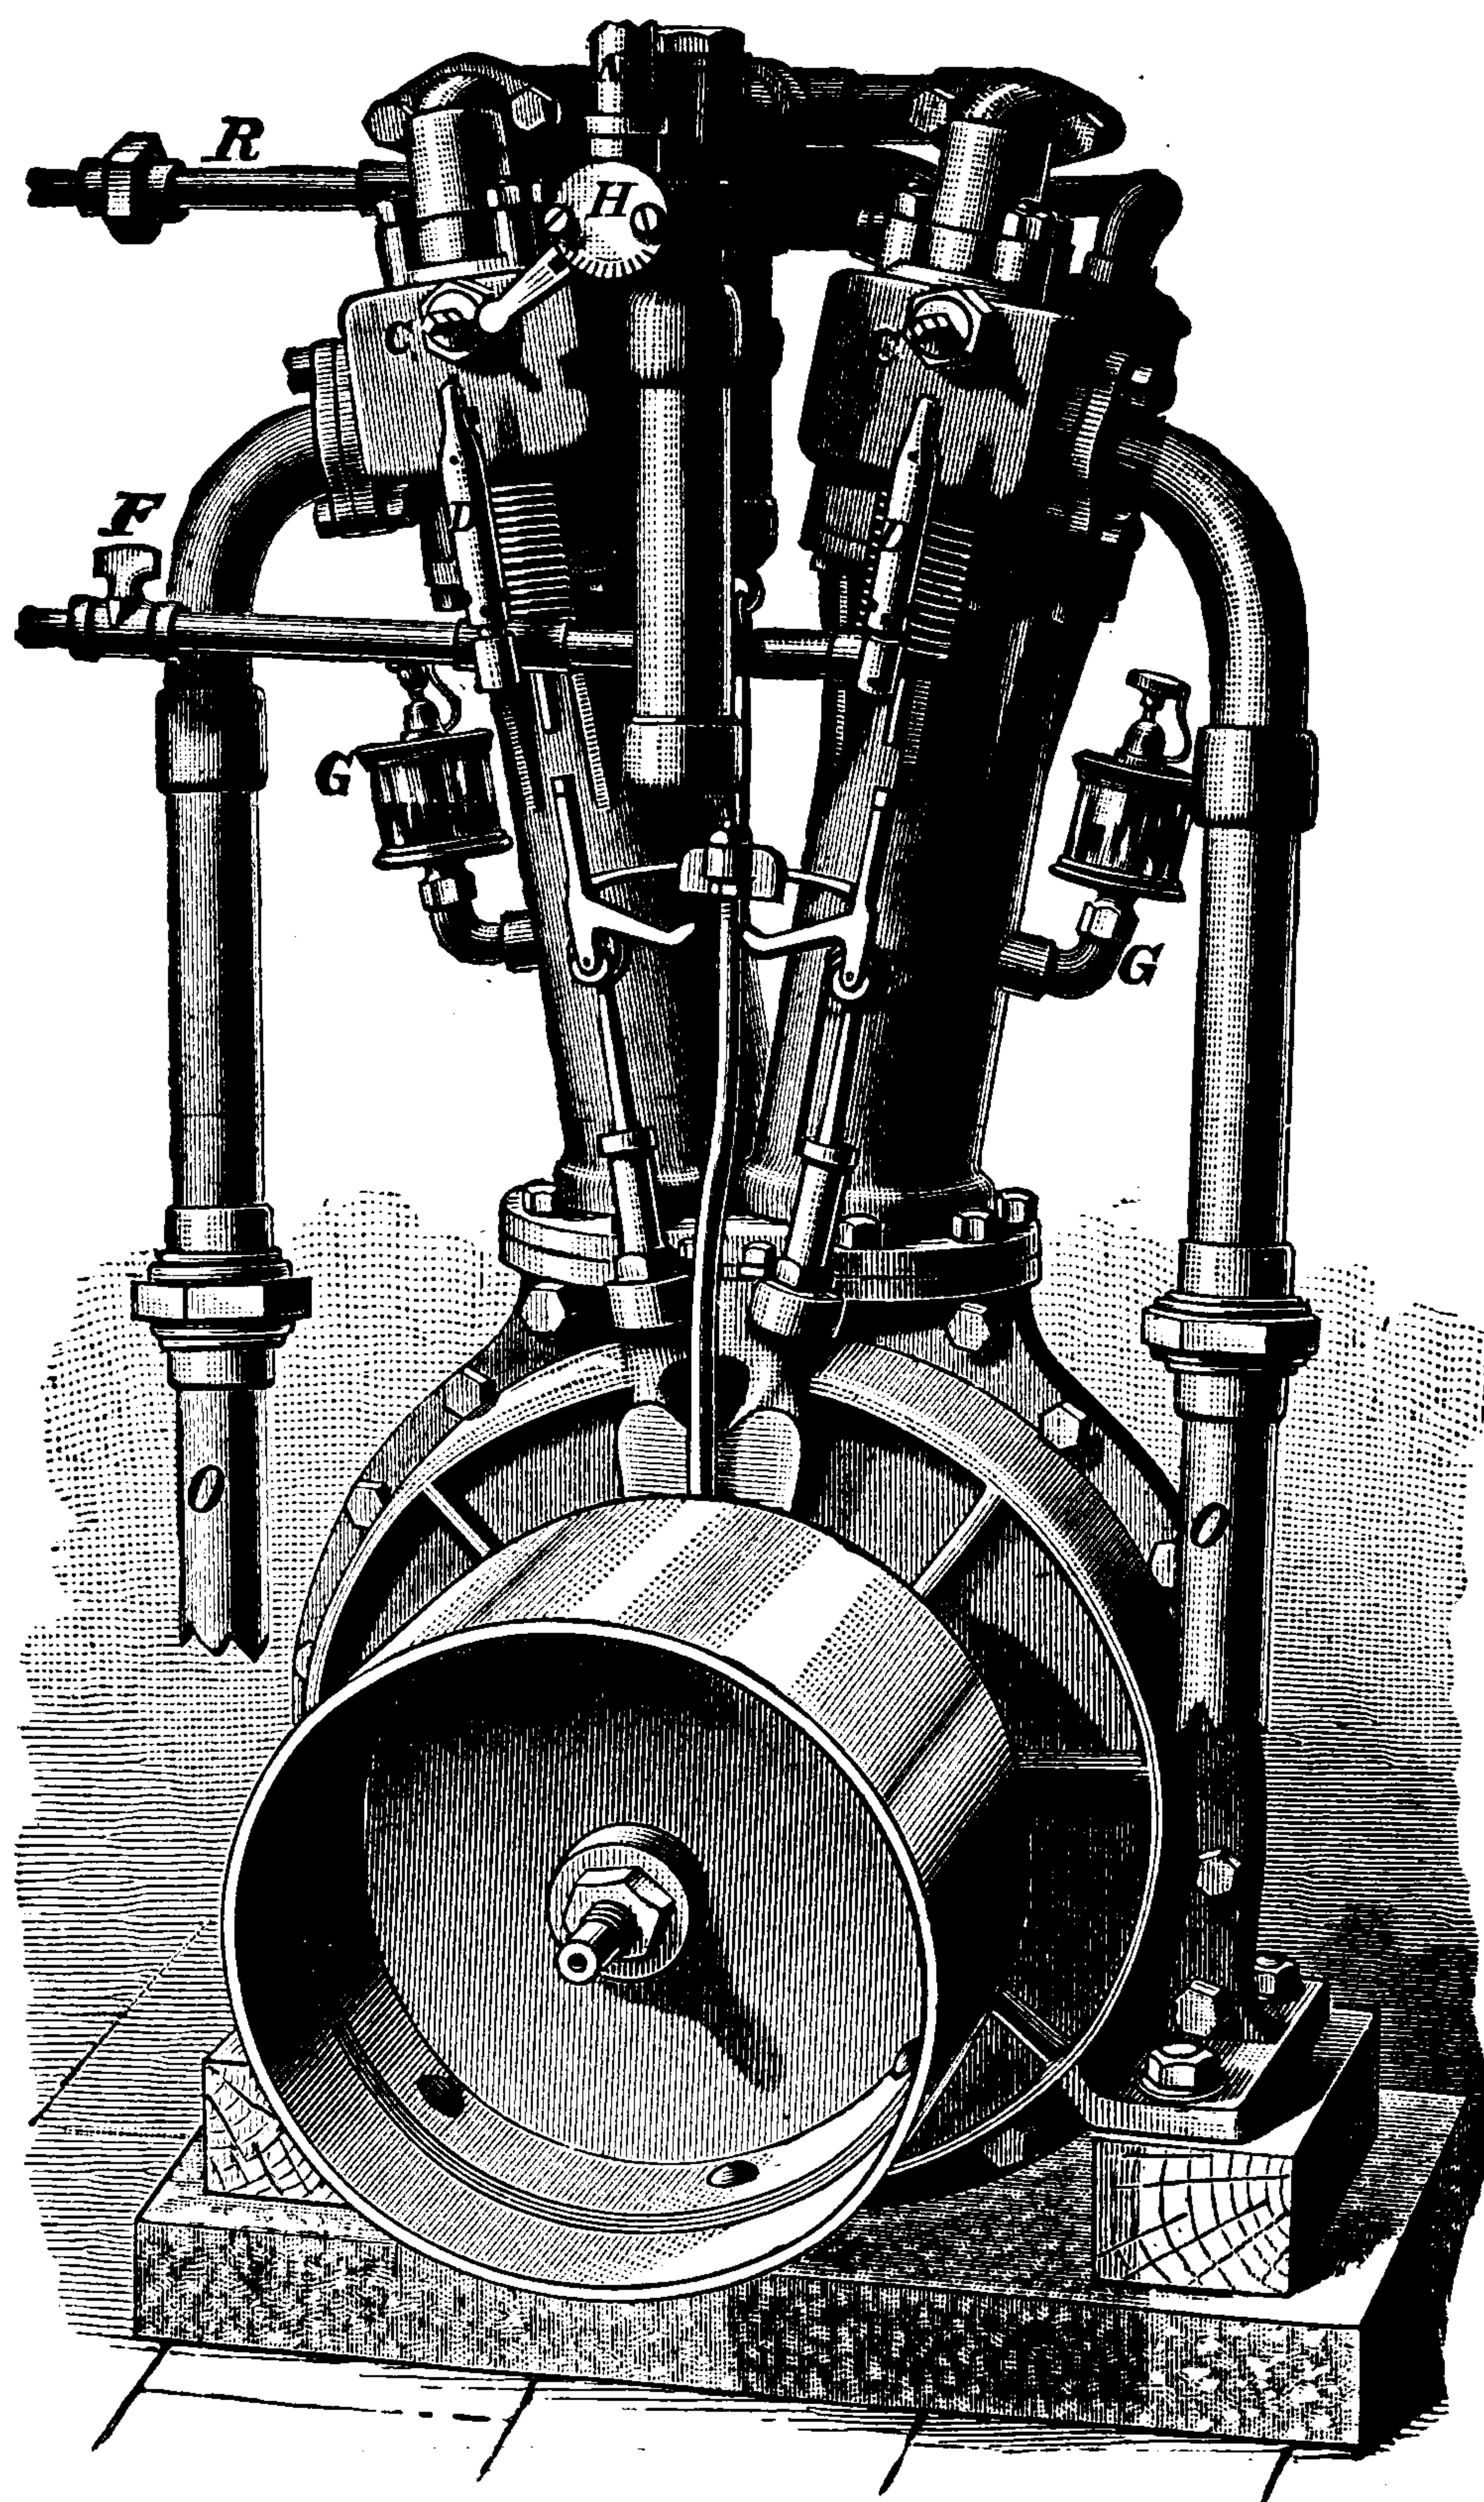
THE DAIMLER TWO-CYLINDER GAS ENGINE.
